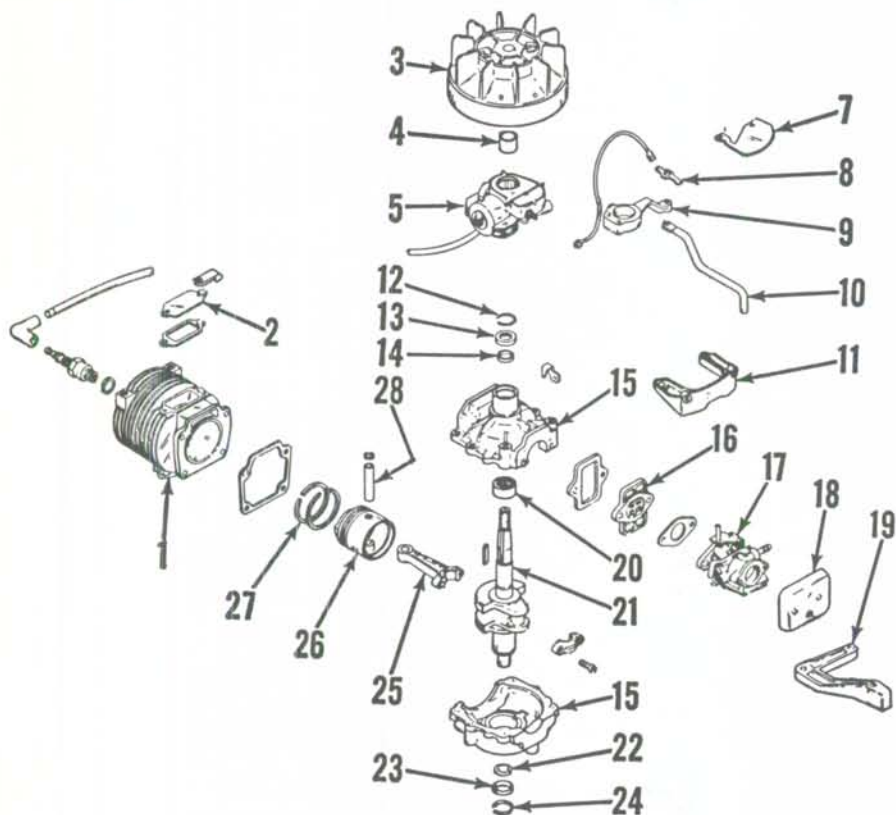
Exploded view of Model V51 power head especially designed for outboard motor application.
